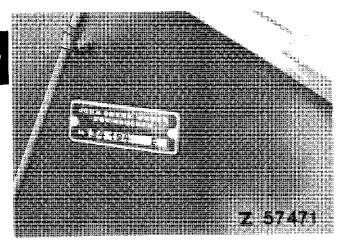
Serial Number of Cutting Platform (14 ft. cutting platform shown)
